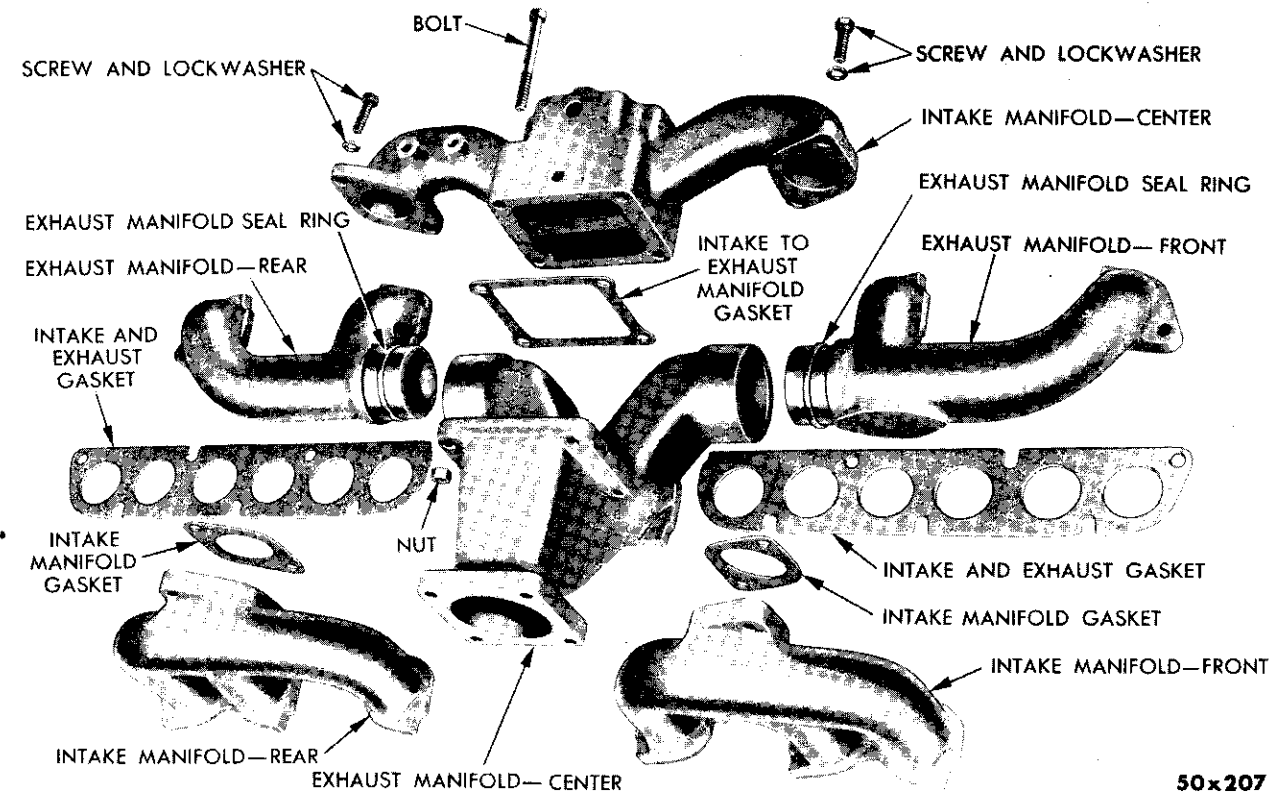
Exhaust and Intake Manifolds (Disassembled View)
